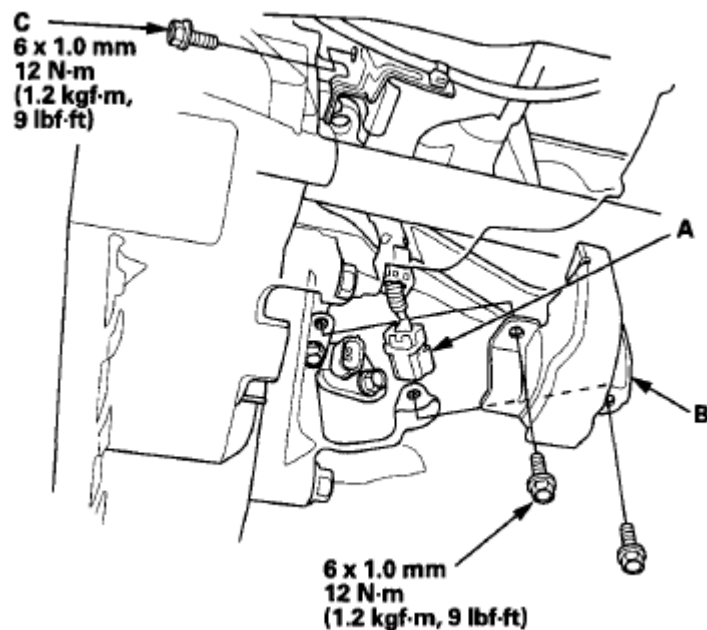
Connecting CKP Sensor Connector With Torque Specifications
